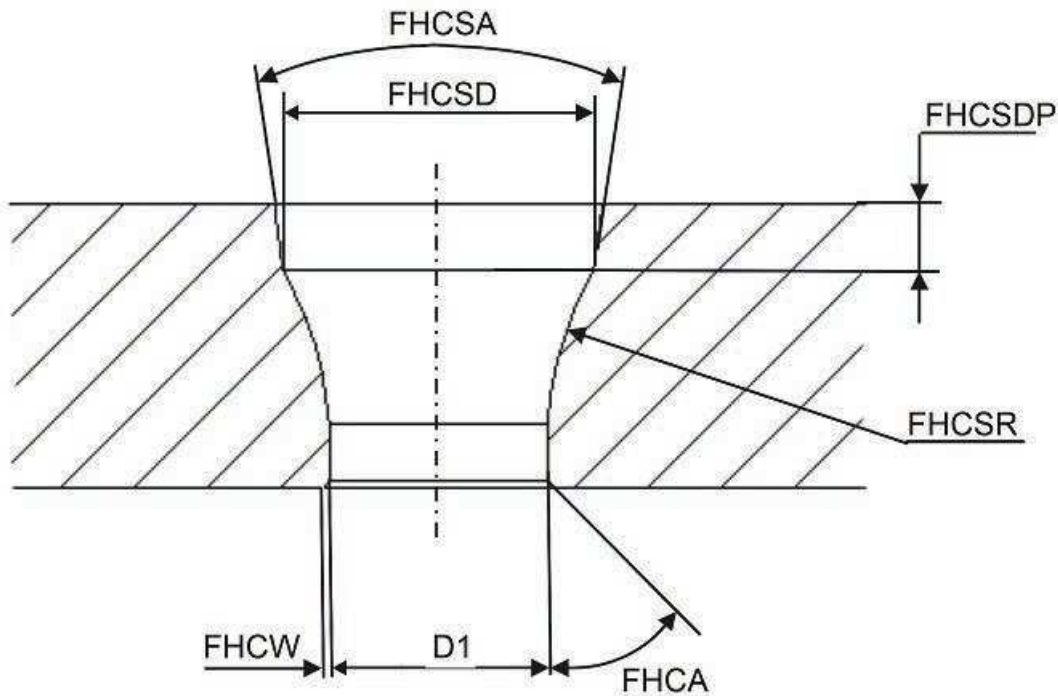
Partly cylindrical fixing hole style 3 or 4
